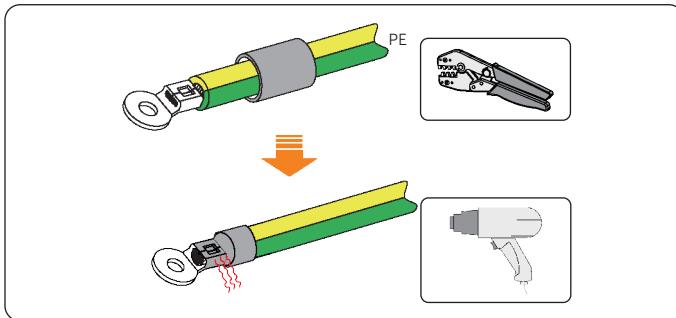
Crimping terminal and heating heat-shrink tubing
